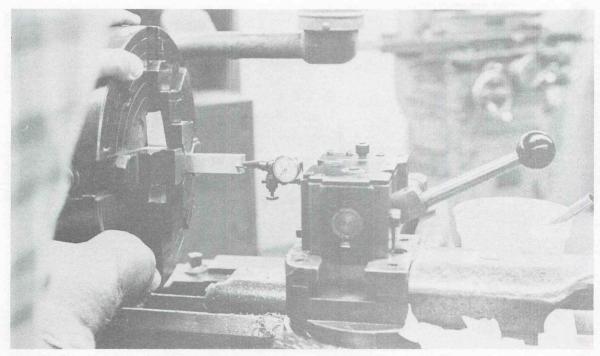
Centering piece of stock with dial gauge in quick-set toolholder.
